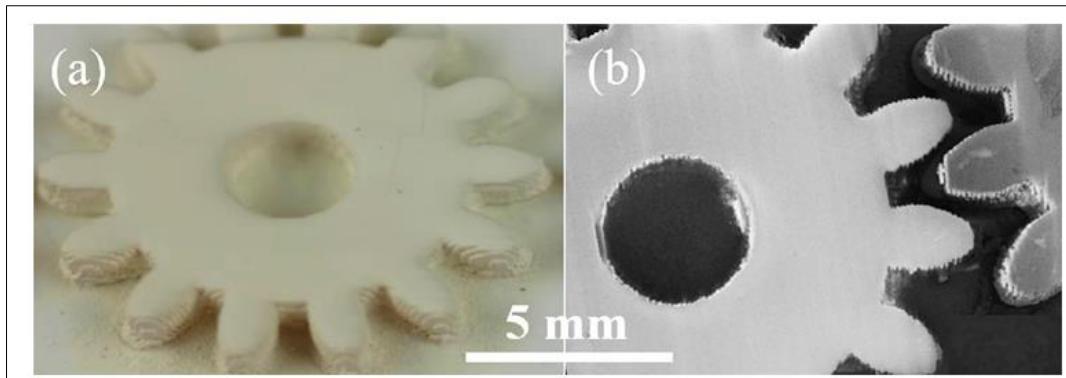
Si₃N₄ gearwheel fabricated by IJP: (a) green part; (b) sintered part [44].
